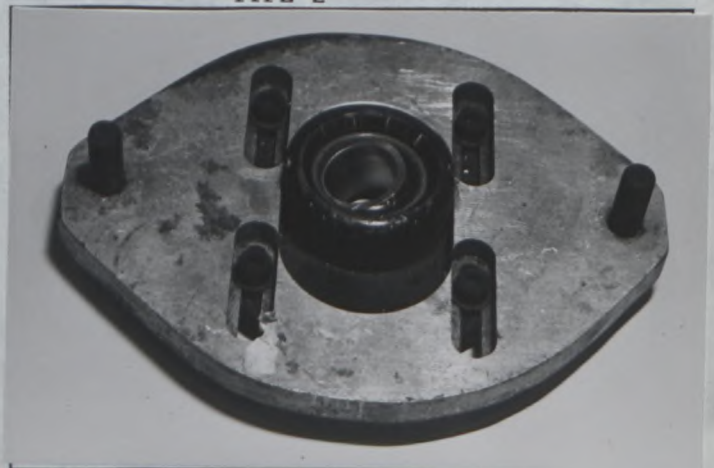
REINFORCED STRUT TOP MOUNT
